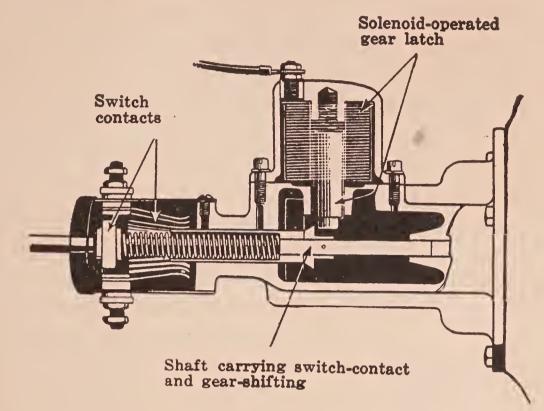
Sectional View of Auto-Lite Starting Switch and Gear Release
